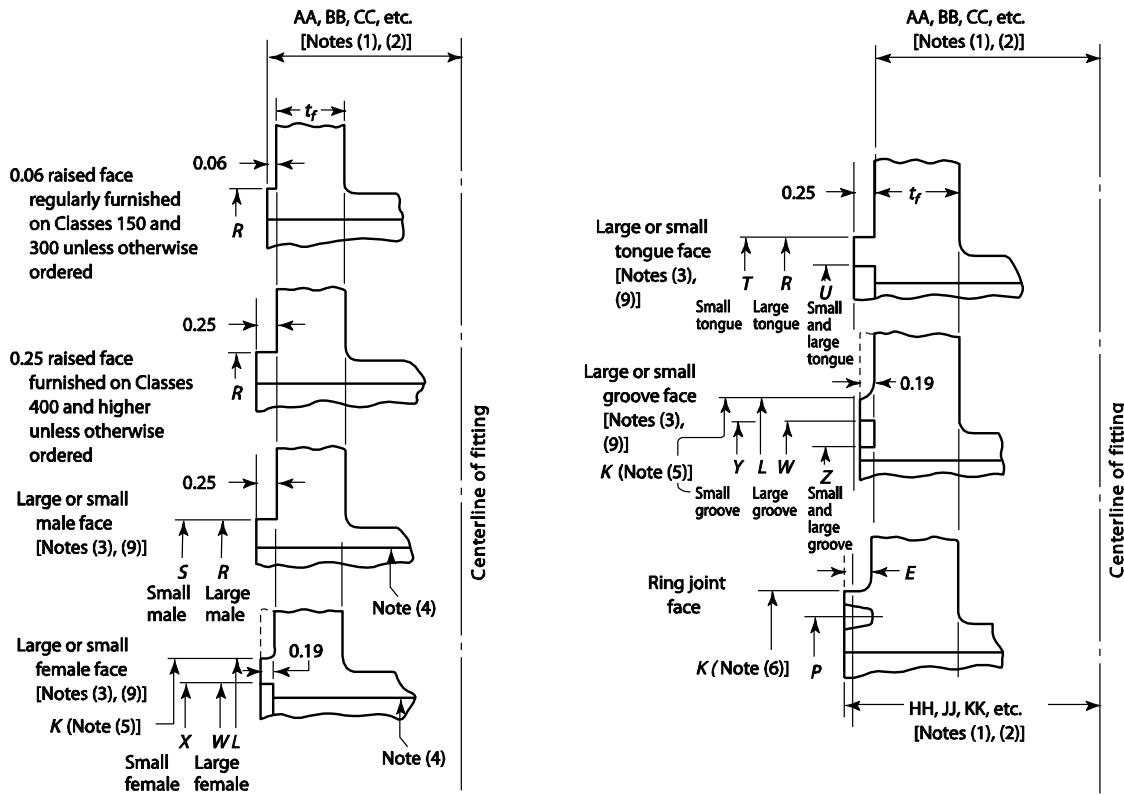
ASME B16.5 – End flange facings [inch] and their relationship to flange thickness and Center-To-End and End-To-End dimensions
